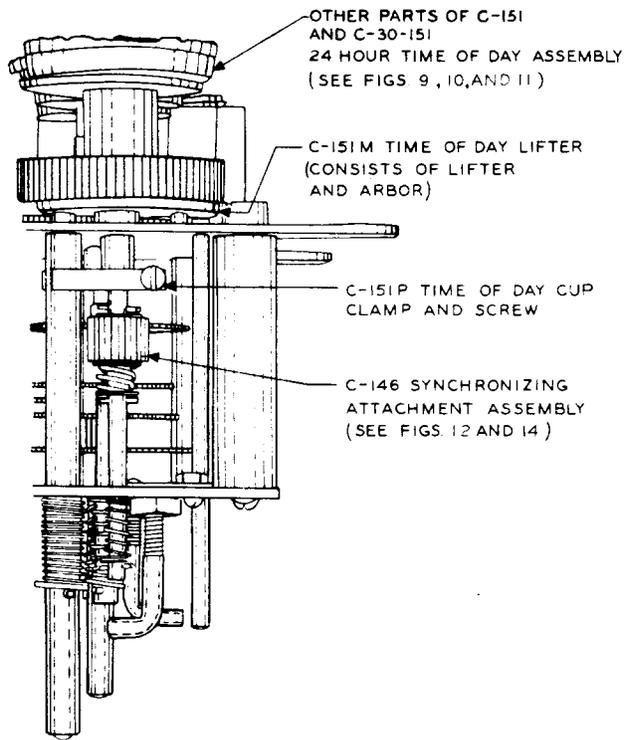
Clamping Arrangement for 24-Hour Time-of-Day Assembly
